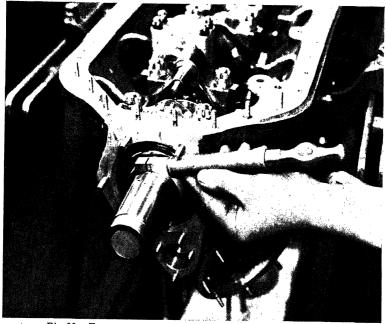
FITTING THE THRUST RACE CLAMP NUT IN POSITION (3).
